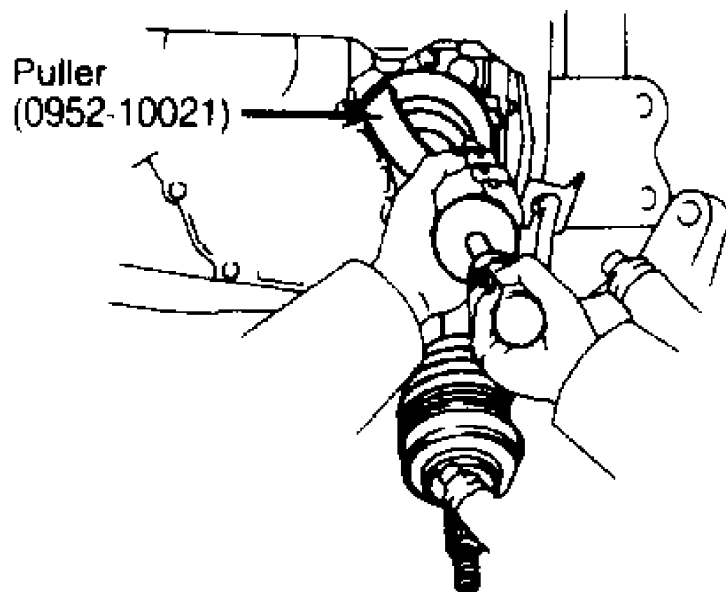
Removing Drive Axle Shaft (Celica & Tercel Sedan)
